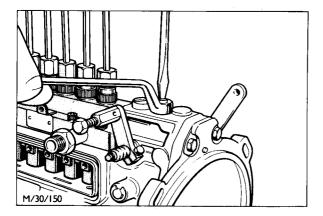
Setting the Maximum Fuel Adjusting Screw on a Naturally Aspirated Pump
